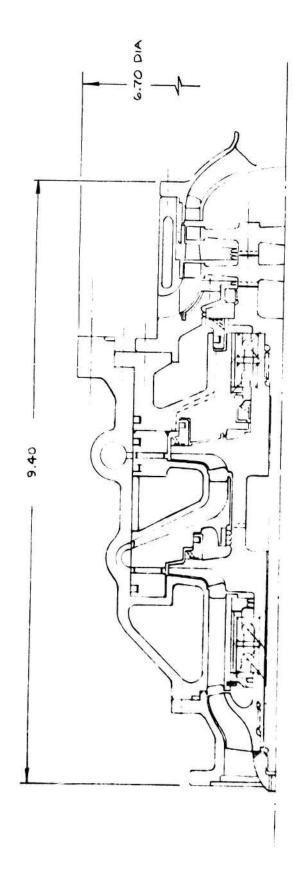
10K Fuel Turbopump Concept, IV - Front-to-Back Unshrouded Impellers
